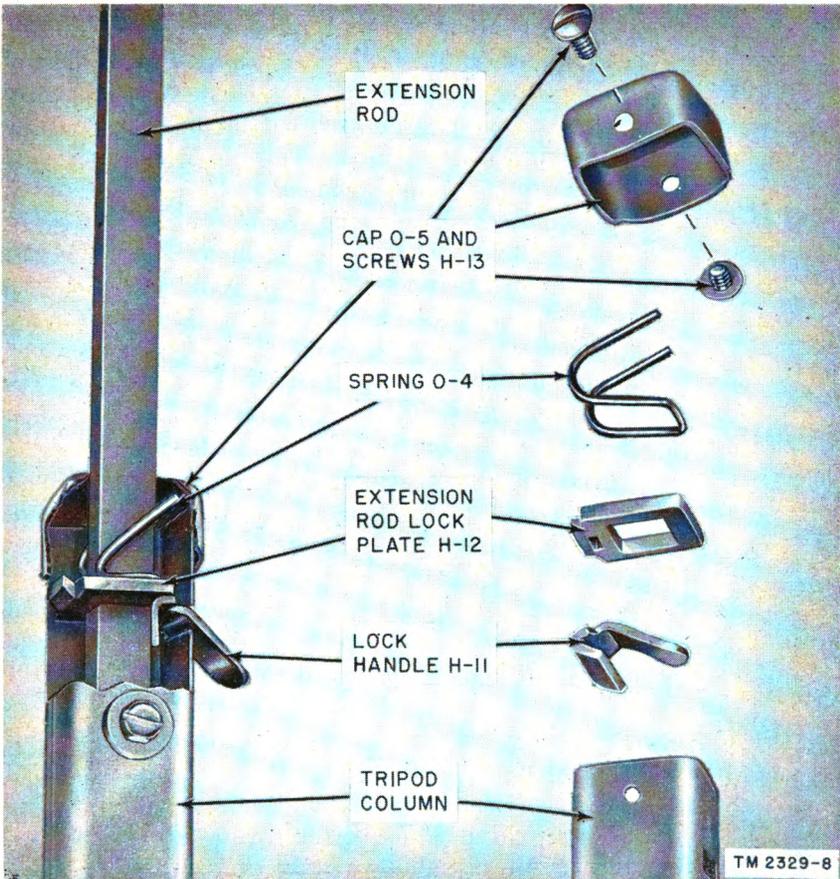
Screen PH-358-C, disassembly of extension rod lock assembly.
